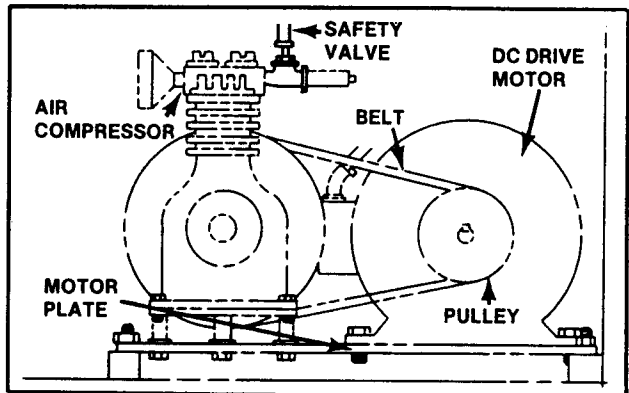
AIR COMPRESSOR ASSEMBLY.
